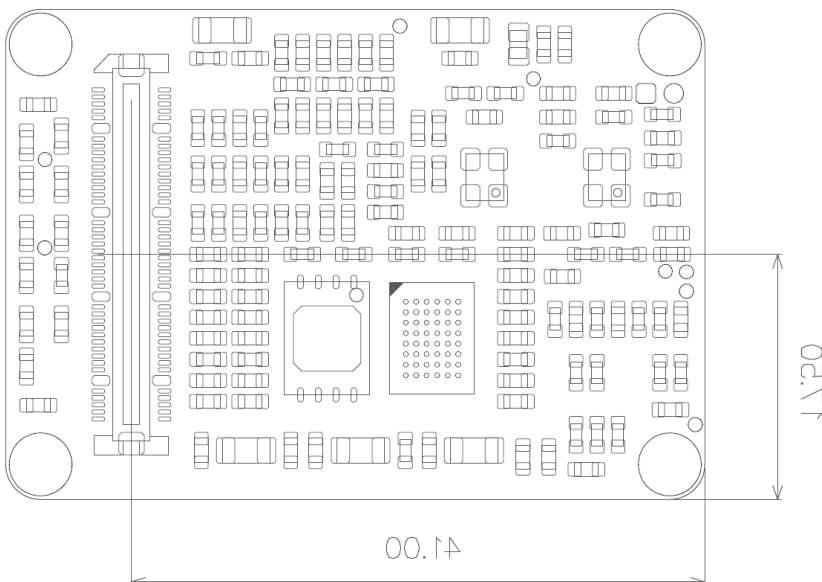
GR716-MINI Board Dimensions (bottom side - expansion connector)
